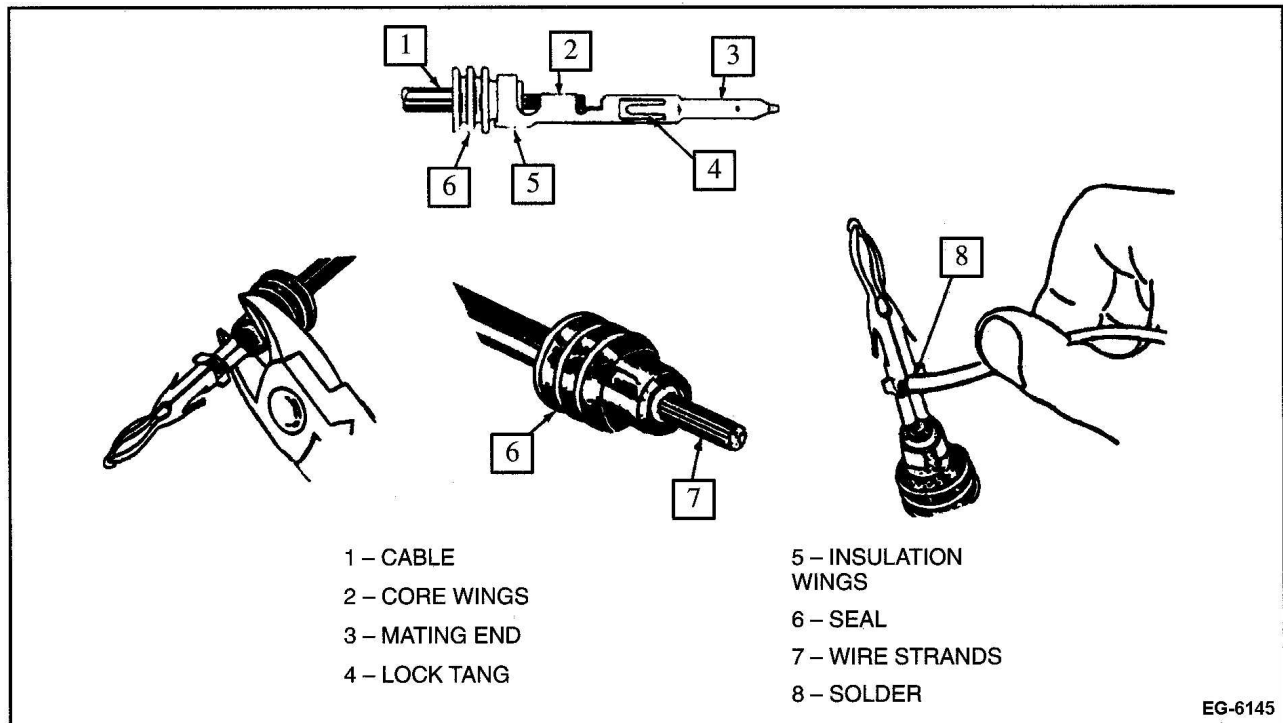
Terminal Replacement—Sealed Weather Pack And Metri-Pack
